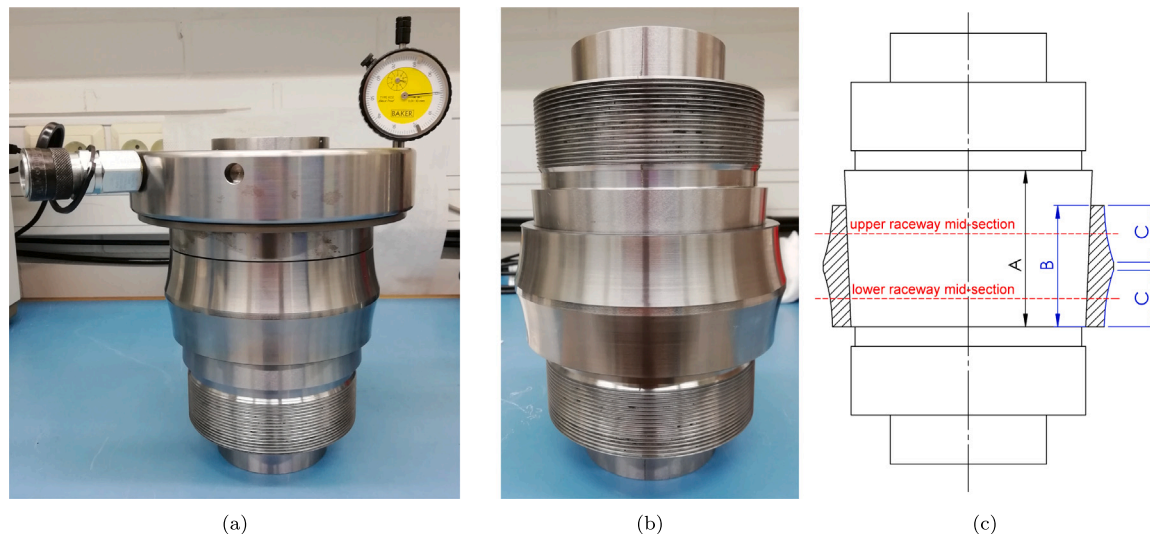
(a) Installation of the IR on the shaft stud using the SKF Drive-Up Method with hydraulic nut. (b) Assembly of the shaft stud and IR in mounted condition. (c) Assembly scheme with indication of the experimental measurement locations; location A is the tapered section of the shaft stud, location B is the IR internal mating surface and locations C are the IR upper and lower raceways.
